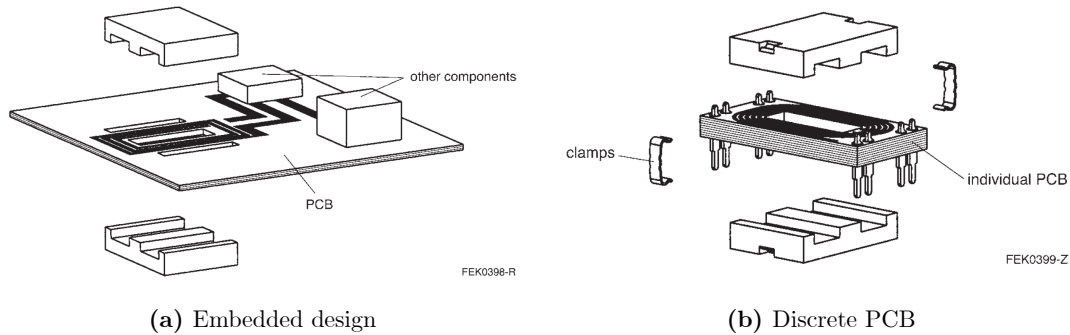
PTFs core assembly as a part of the converter PCB (embedded), or a discrete PCB with proper connectors [101].
